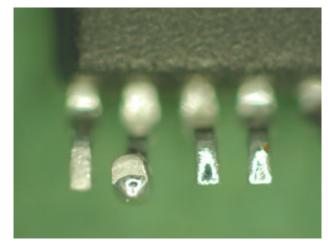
The bottom of Pin 7 exhibits both a melted and a fractured surface.
